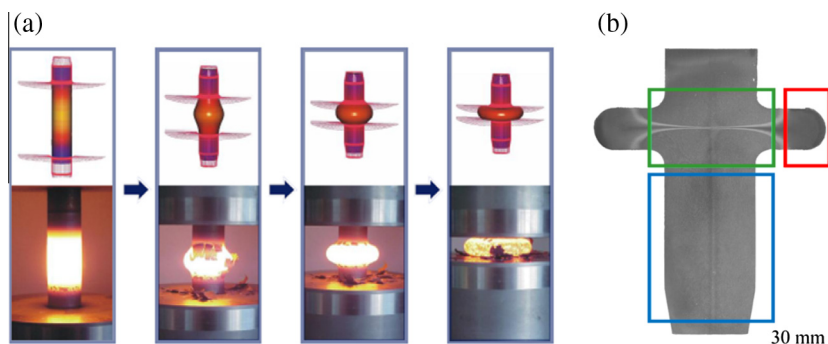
(a) Thermomechanical production of the graded flanged shaft [13,14], (b) flanged shaft with material gradation [15,16].
